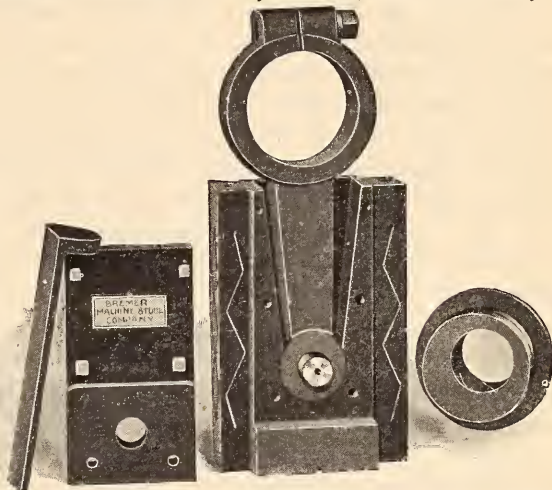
CONSTRUCTION OF CROSSHEAD AND CONNECTING ROD, BREMER MACHINE & TOOL CO.
